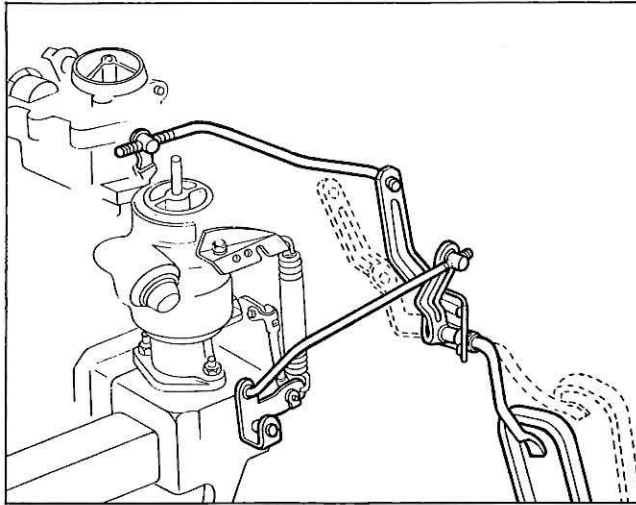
6 Cyl. Engine Accelerator Pedal Bellcrank
